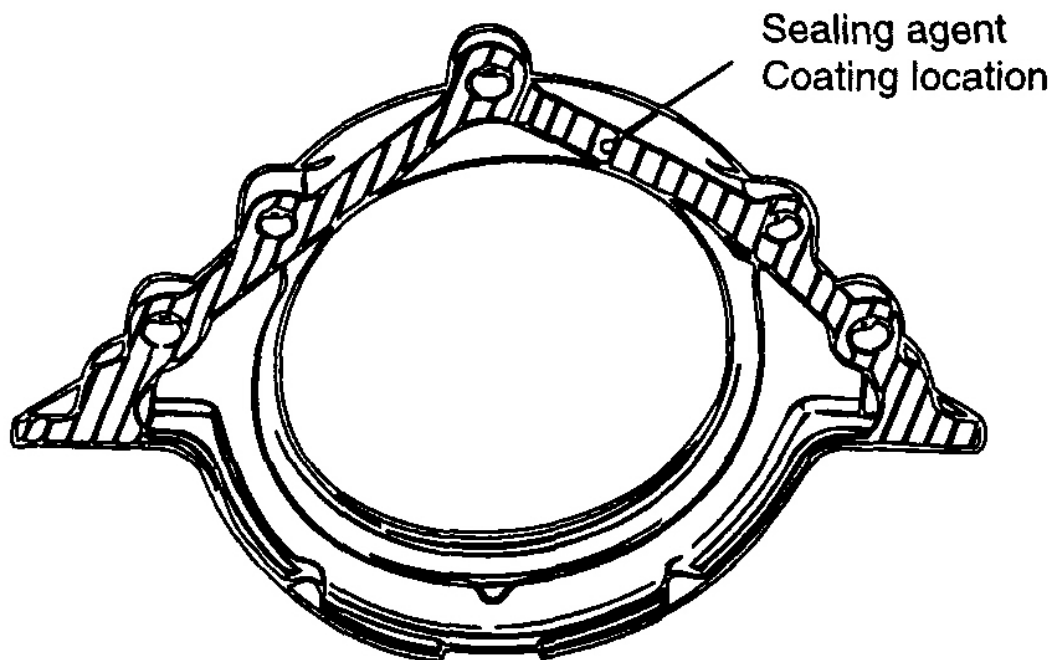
Installing Rear Oil Seal In Oil Seal Case
